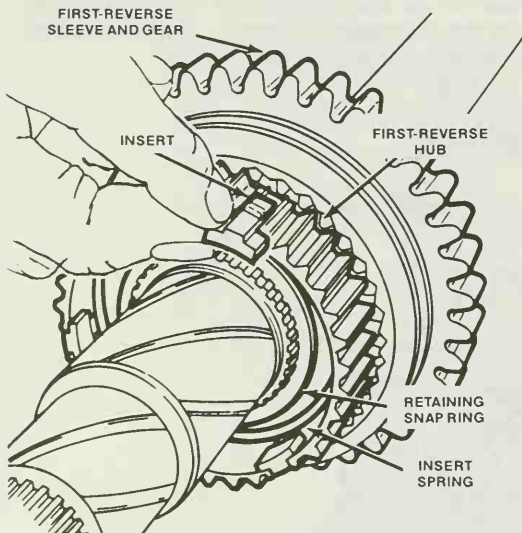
Installing inserts in first-reverse hub. (American Motors Corporation)
